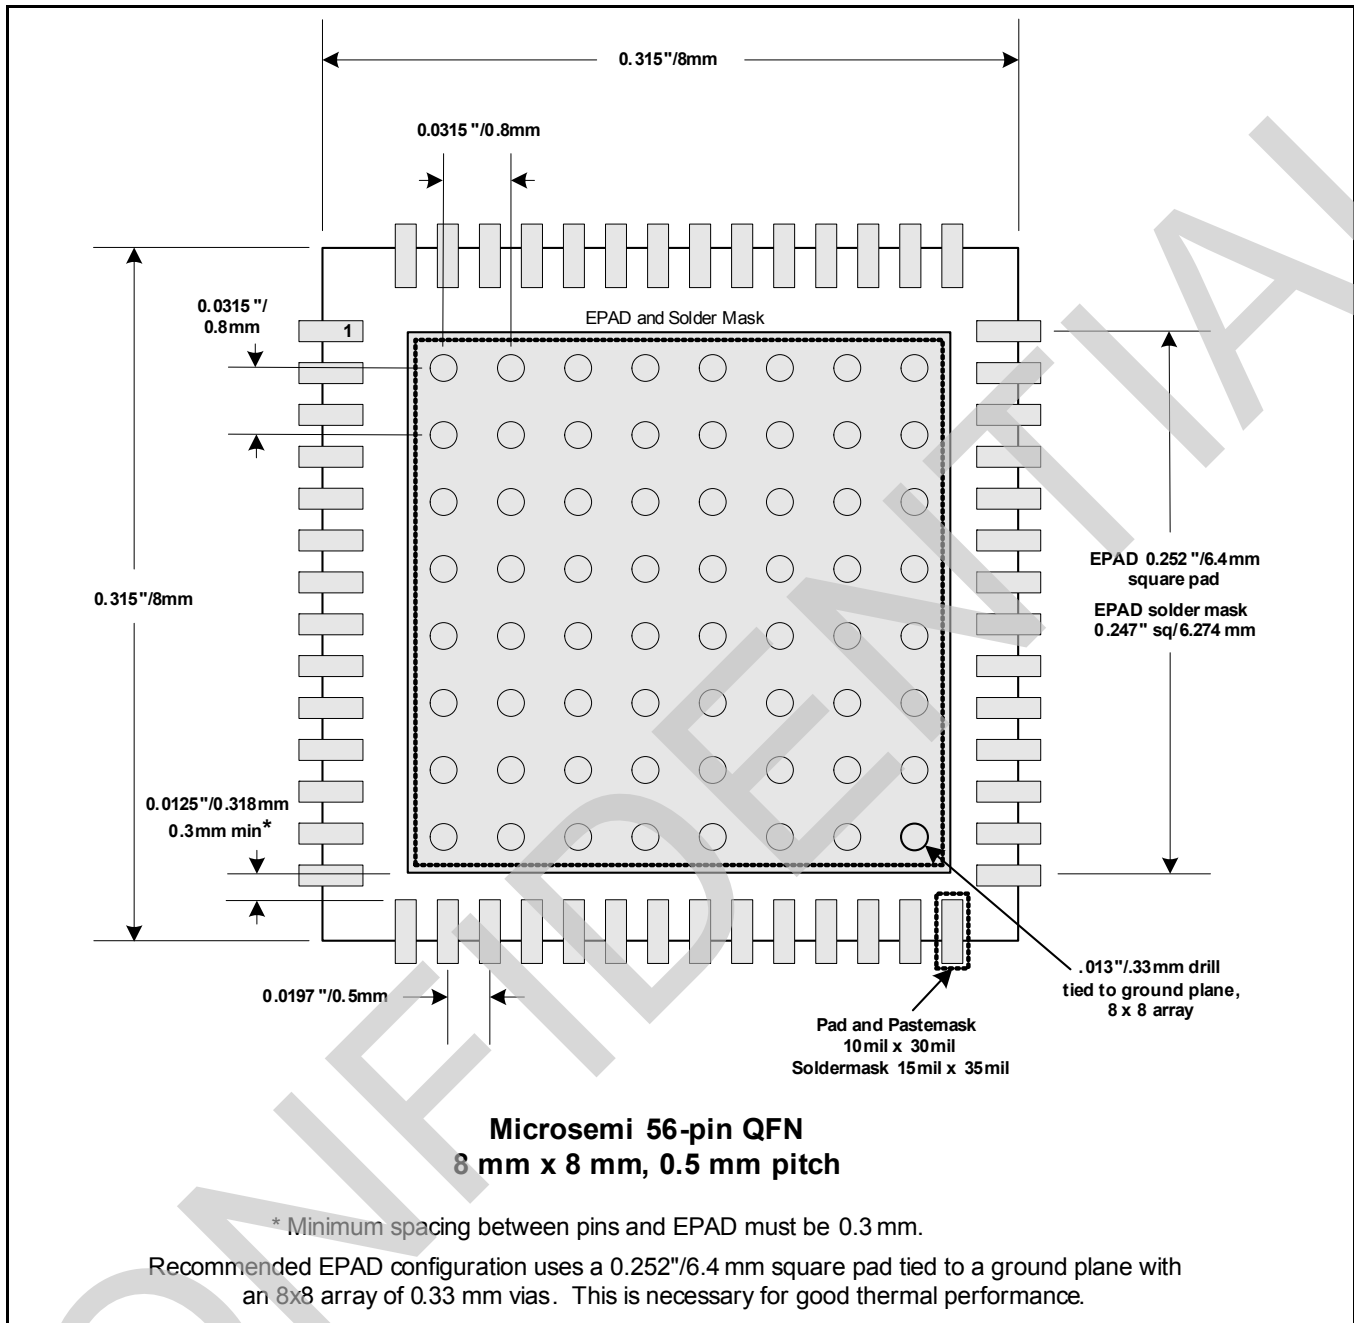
Recommended Land Pattern (56-Pin QFN) – Top View
